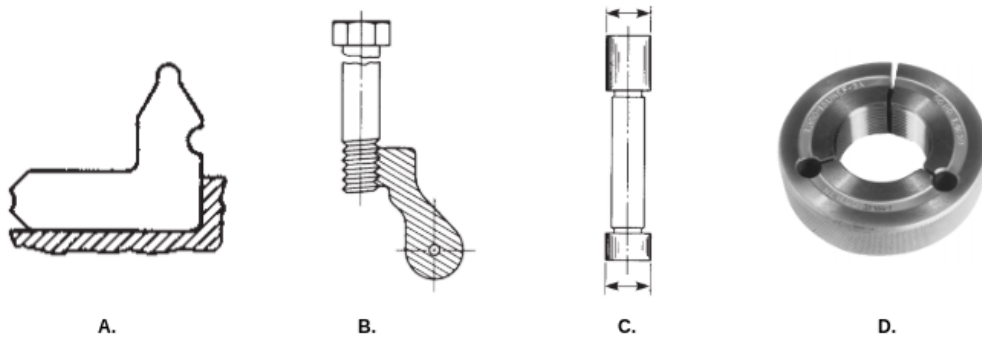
Types of gauge tools used by industries. Adapted from [29].
